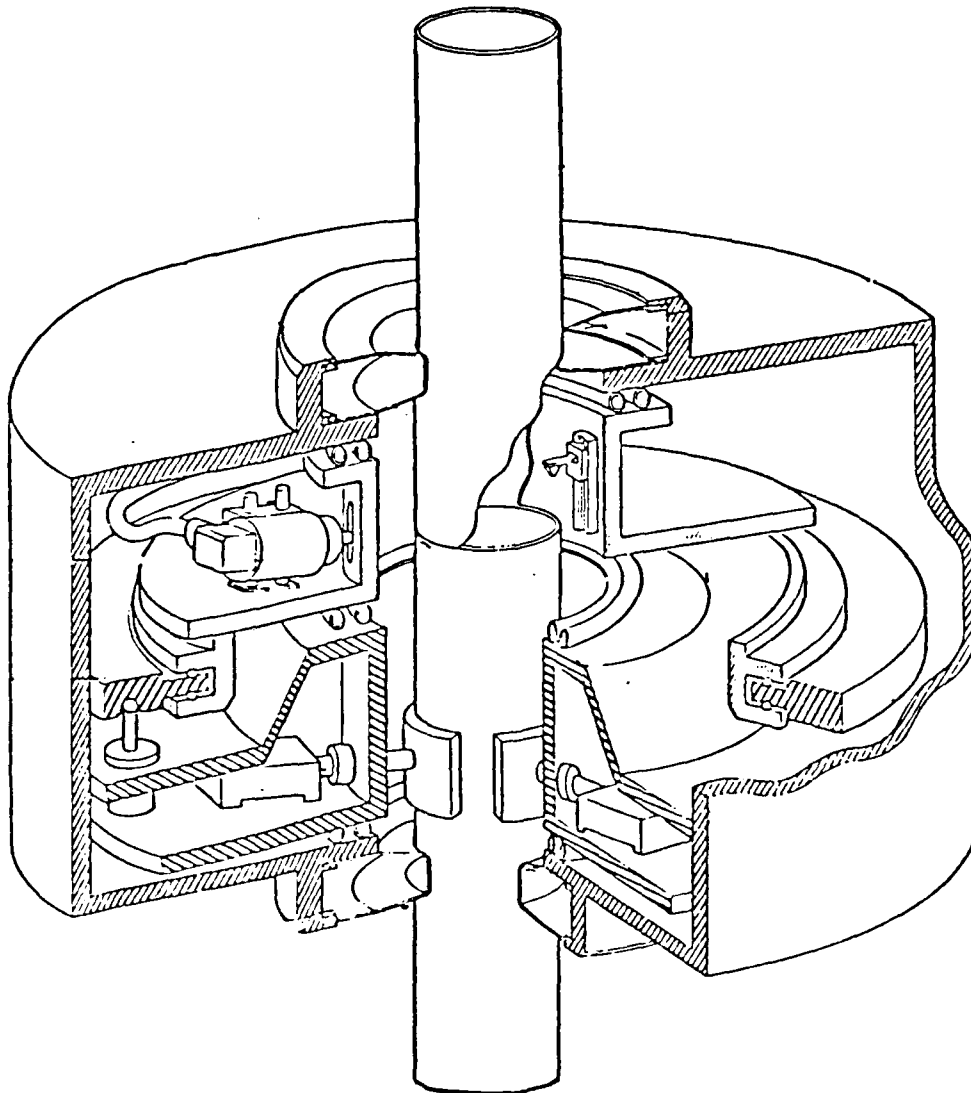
EXTERNAL EB SET-UP FOR WELDING PIPE JOINTS
